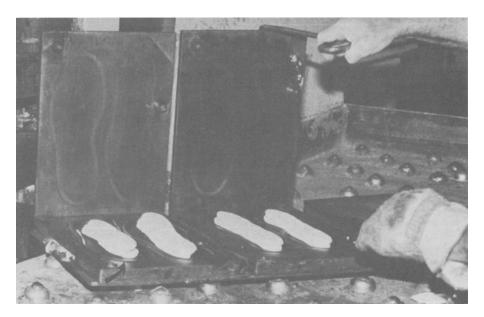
A preweighed "biscuit" of rubber in a compression mold before molding.
